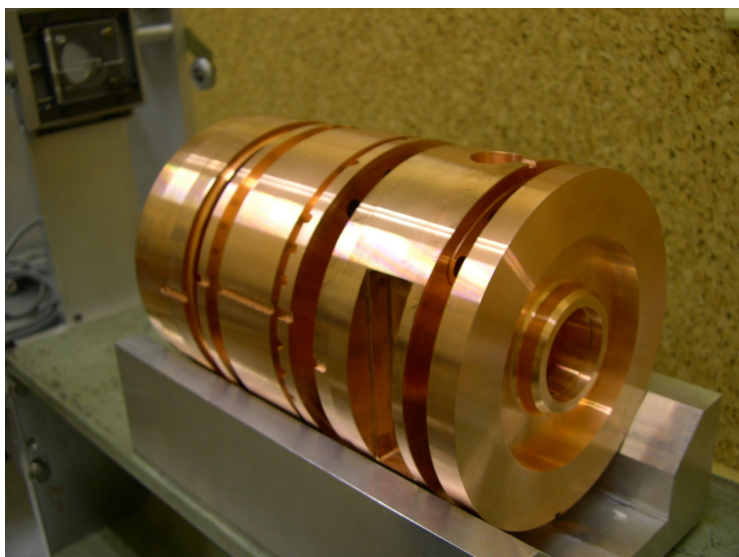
Prototype of the drive beam photo-injector.
